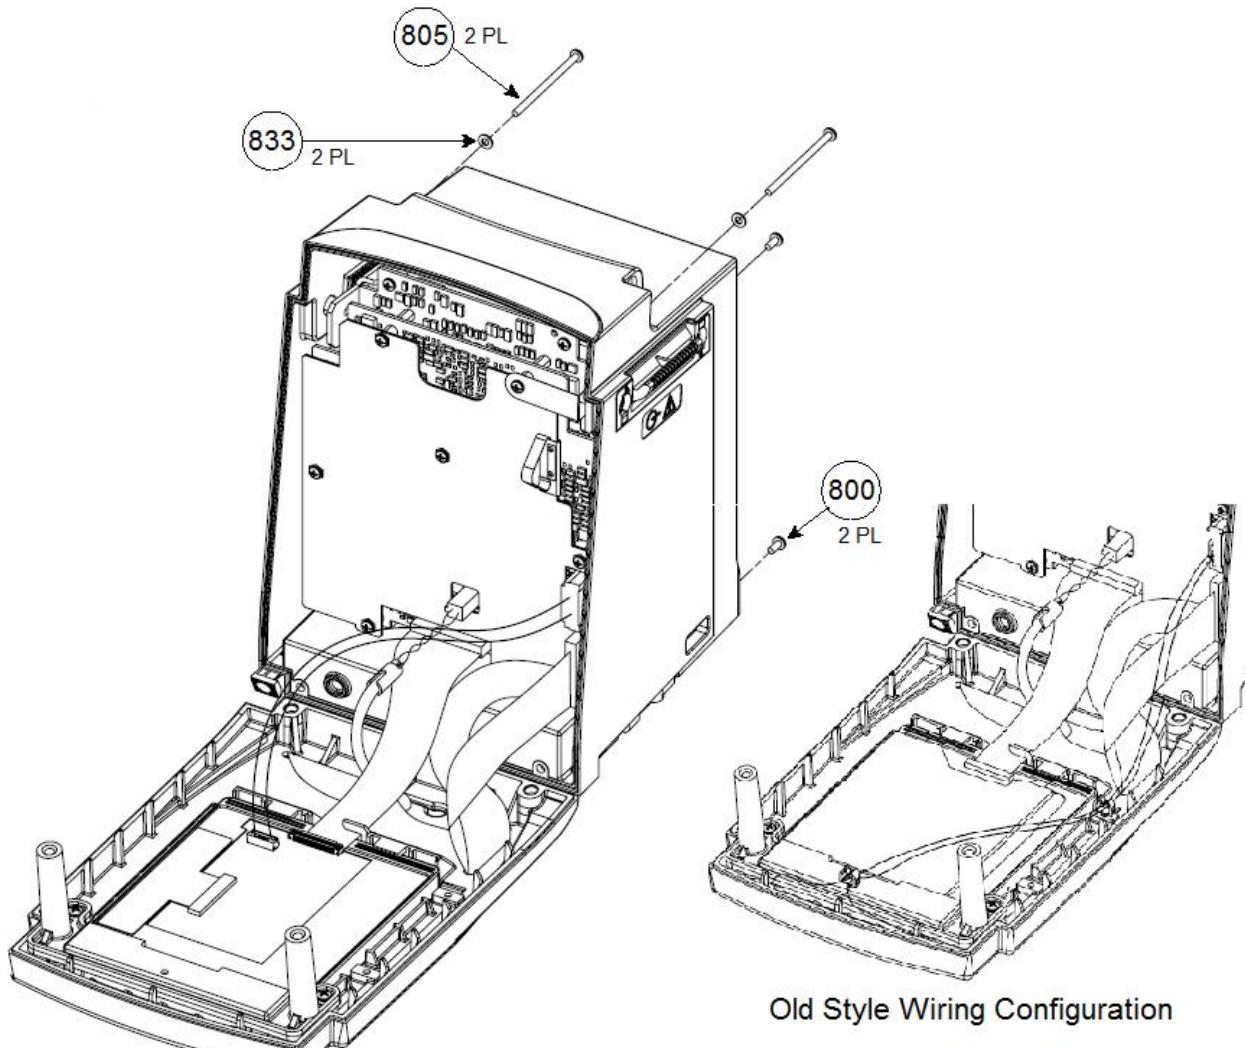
Model 8015 - Front to Rear Case Assembly
